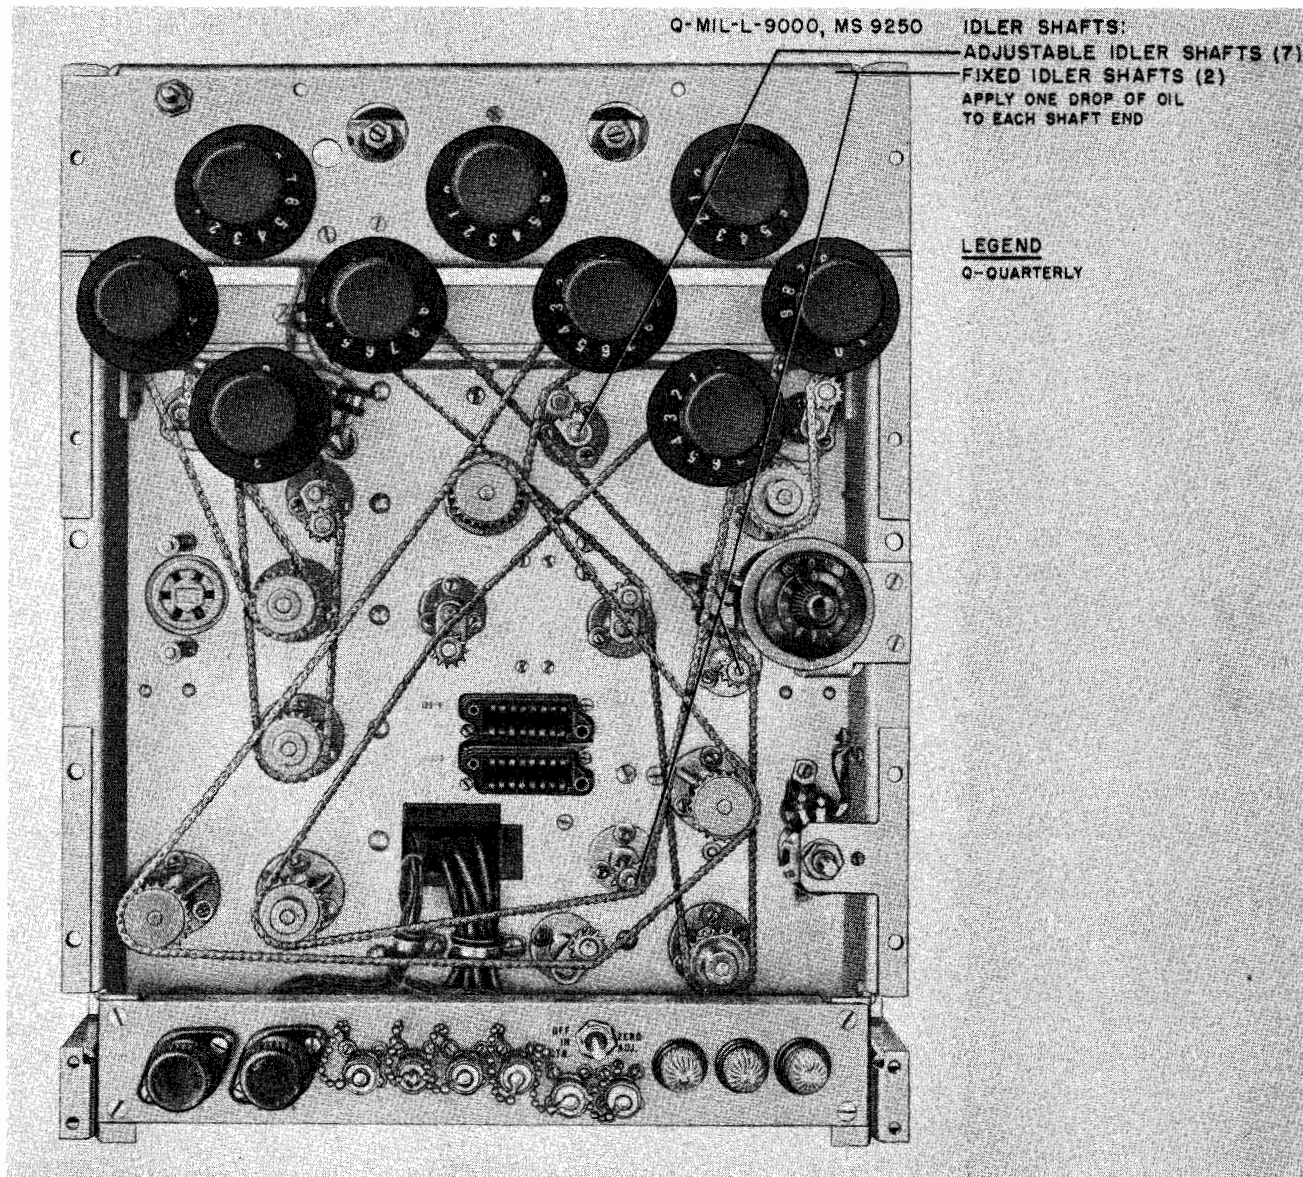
RFO, Control Panel Removed, Idler Gear Lubrication
